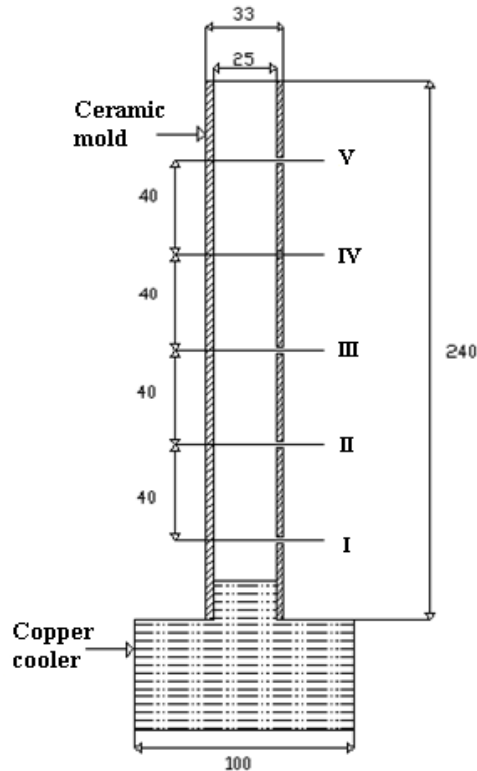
Section of copper cooler ceramic mold used in the casting process. (The dimensions on the picture are taken in mm)
